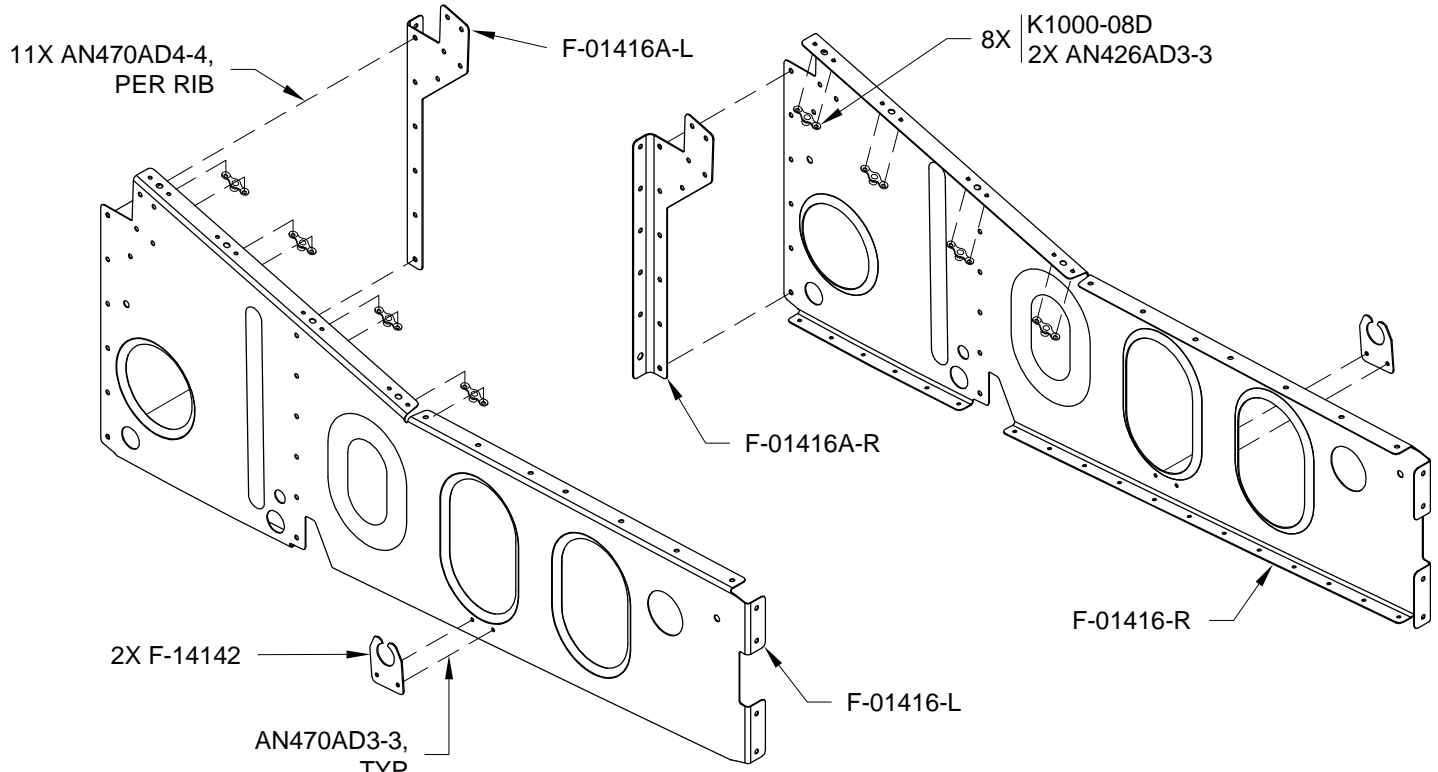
RIVET NUTPLATES & DOUBLERS TO RIBS
